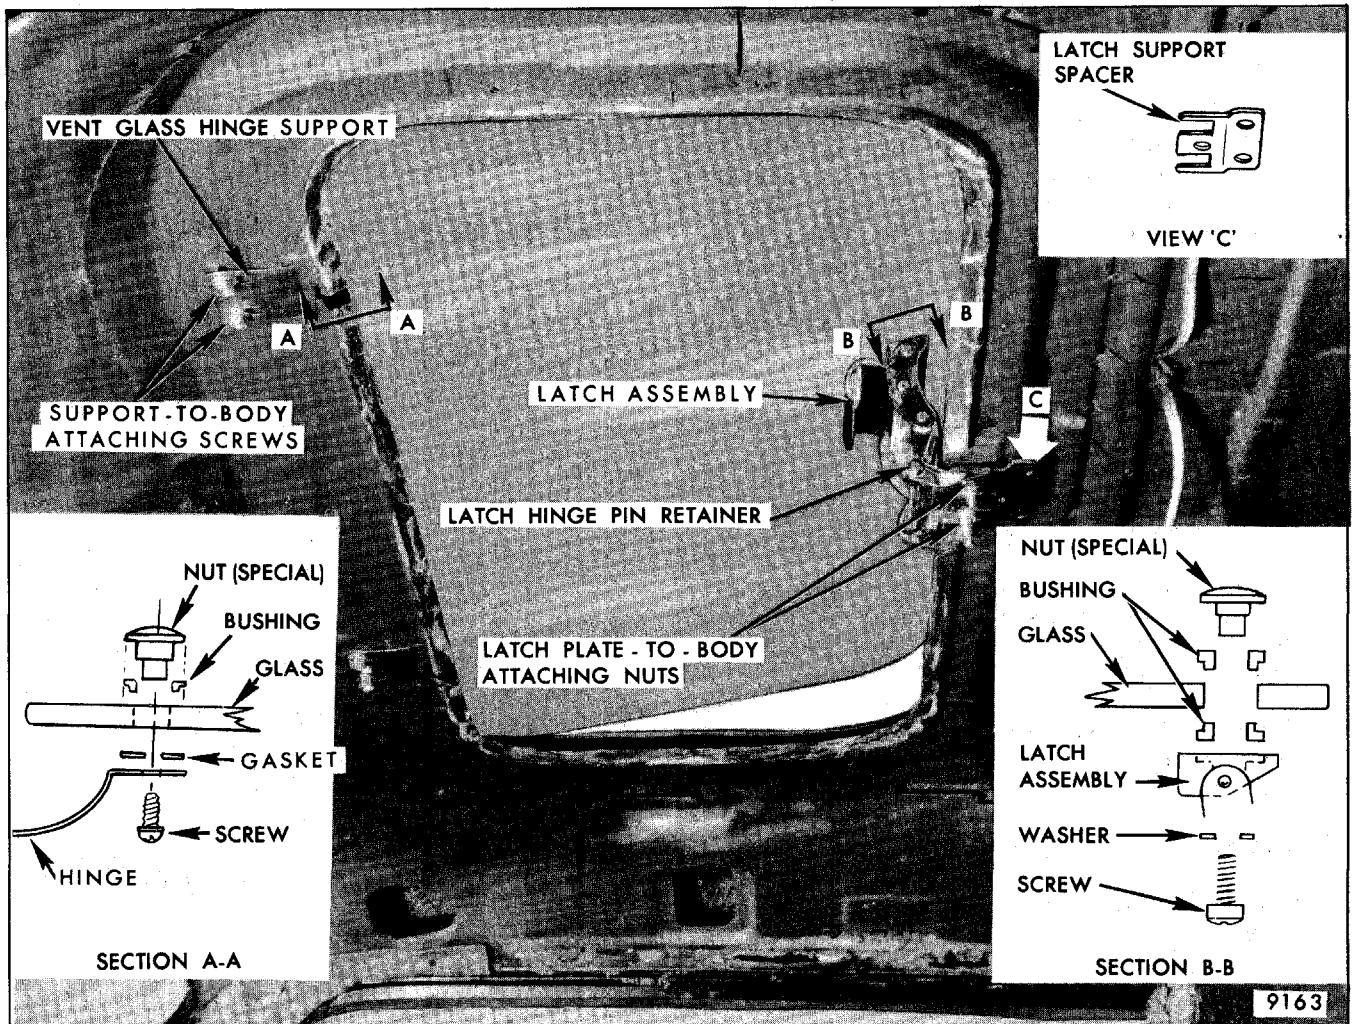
Vista Vent Hardware (Headlining Removed for Illustrative Purposes Only)
